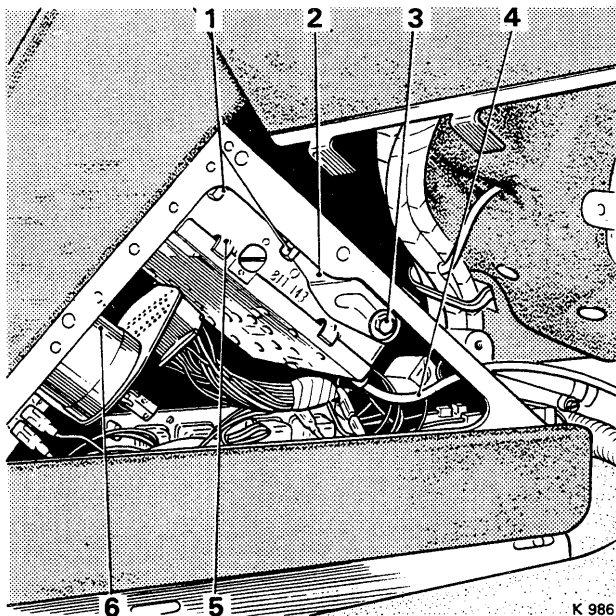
RECEIVER IN CONSOLE TRIM REMOVED
